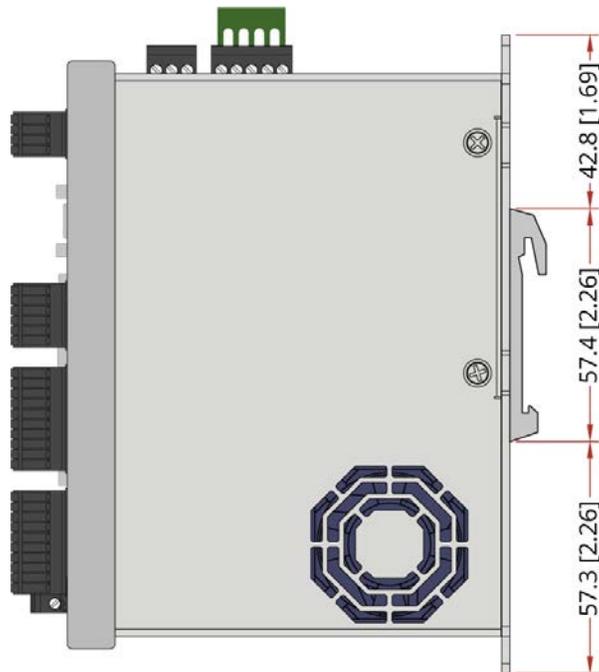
XC2/XC2e DIN Rail Clip Dimensions
